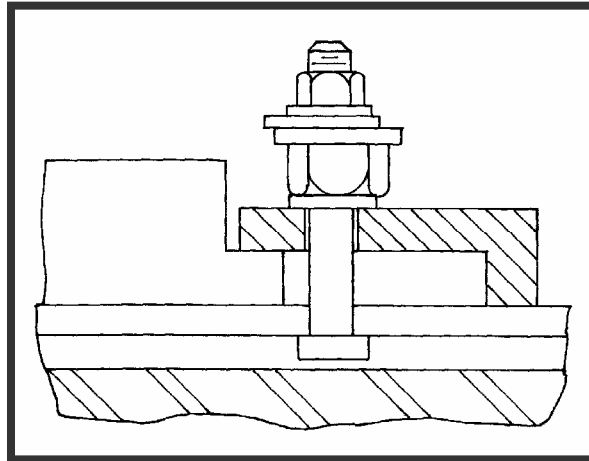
Always use the shortest bolt that will permit proper thread engagement. This condition can endanger the operator and is more expensive than a proper length bolt
